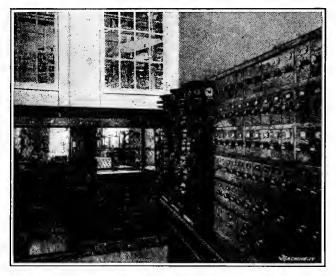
View in Tool Supply Room showing Revolvable Racks for Milling Cutters
